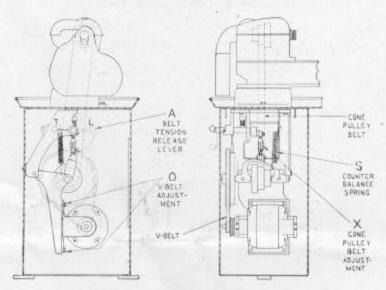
Setting the drive to get the proper belt measurement on the 9" Underneath Drive.
